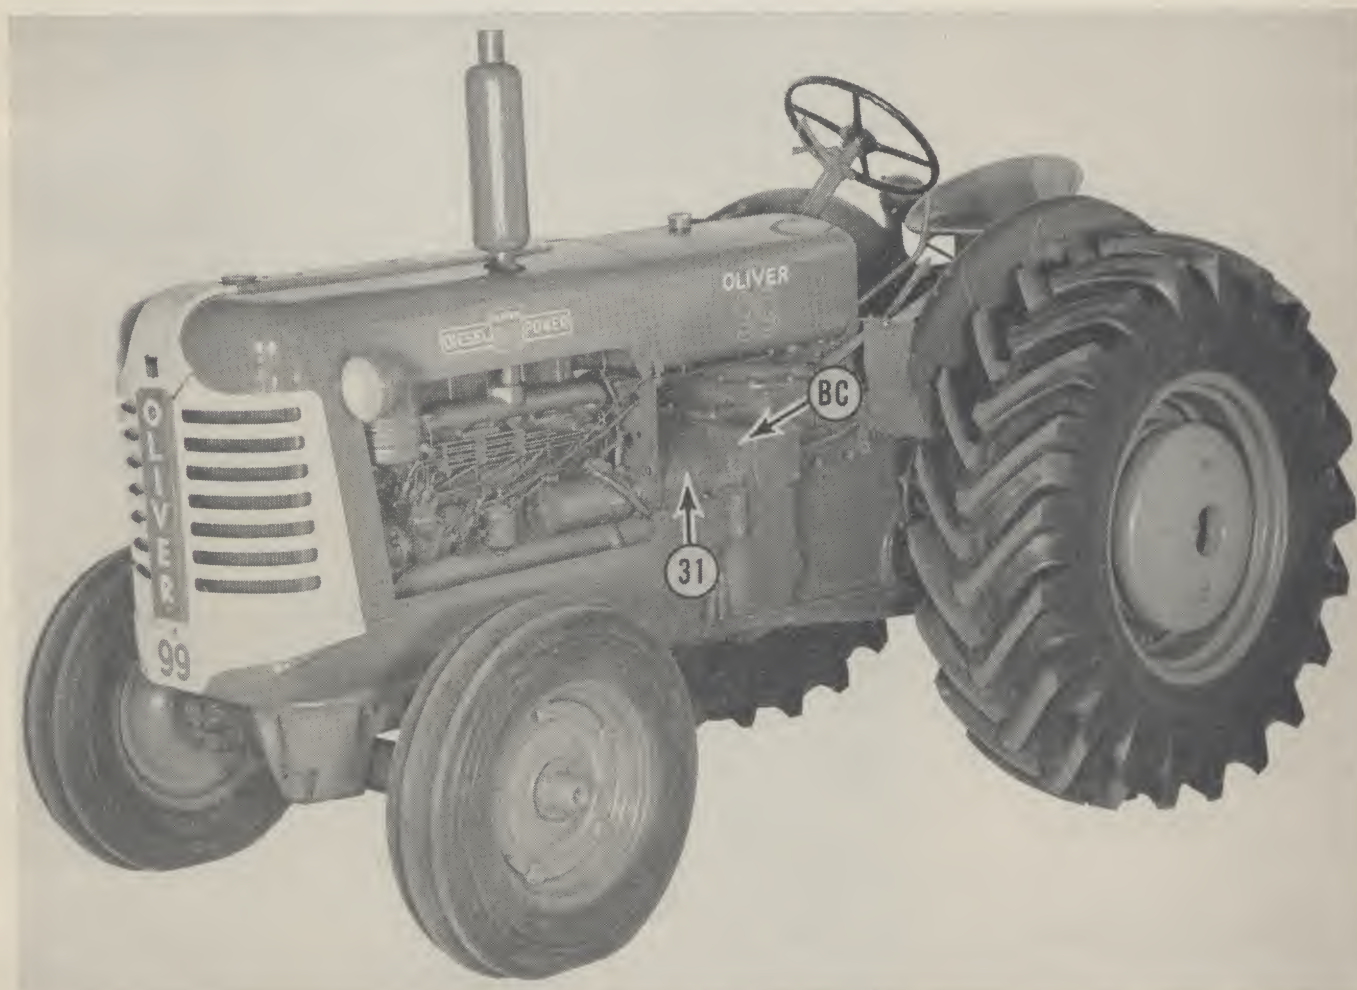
A—On tractors with 4 speed transmission access to clutch shaft coupling can be obtained without removing the belt pulley carrier (BC).
